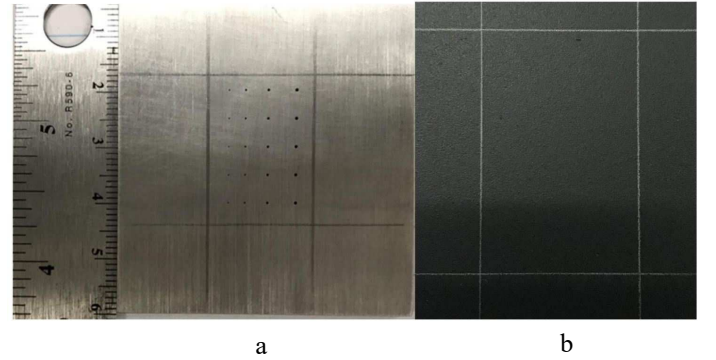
Front Surface (a), and Back Surface (b) of SS316L FBH Specimen Plate
